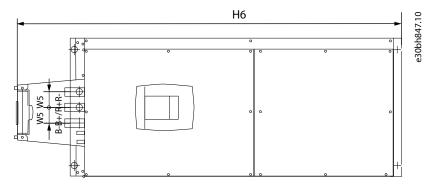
Dimensions of the VACON® NXS/NXP AC Drive, FR9 with DC Extension Connection Box
